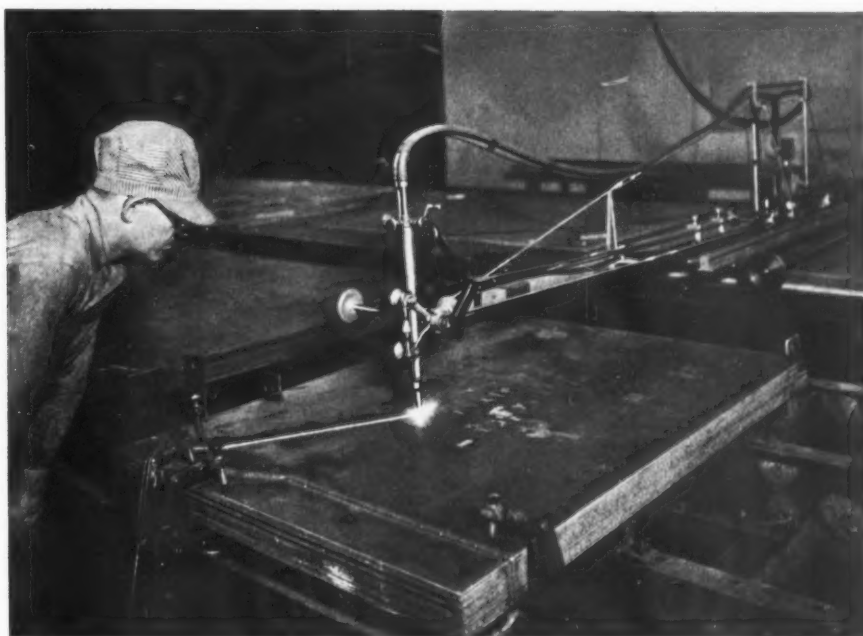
Quick-acting Toggle Clamps Used to Hold Twelve 1/4-inch Plates for Flame-cutting Coal-car Hopper Sheets
